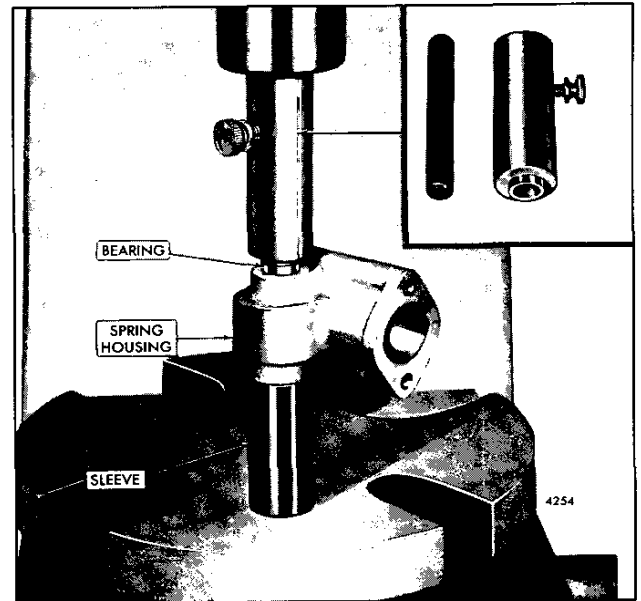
Installing Speed Control Shaft Bearings in Spring Housing Using Tool J 9196
